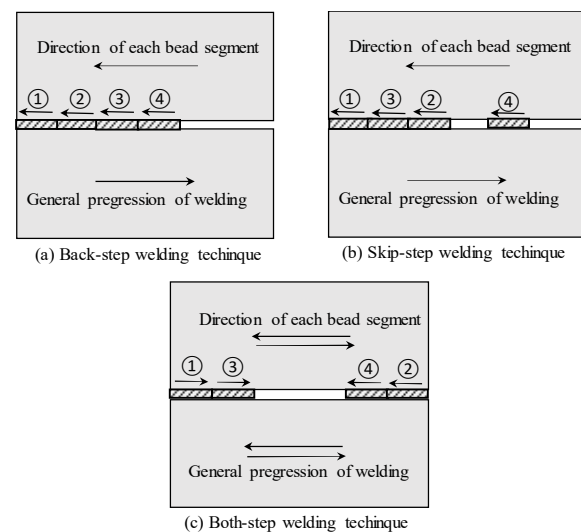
Back-step, skip-step, and both-step welding techniques.
